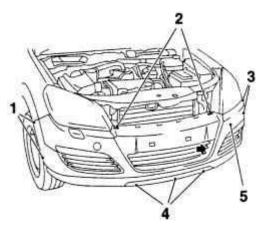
Mounting pads front bumper: 1, 3 - mounting screws, 2, 4 - locks, 5 - lining
